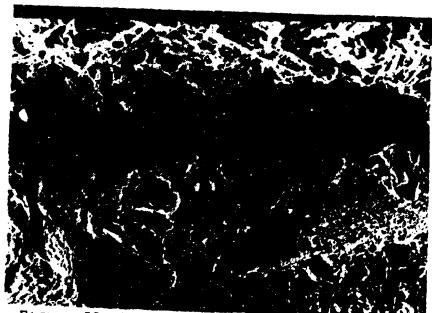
Fracture Surface of Hourglass Specimen No. 6
